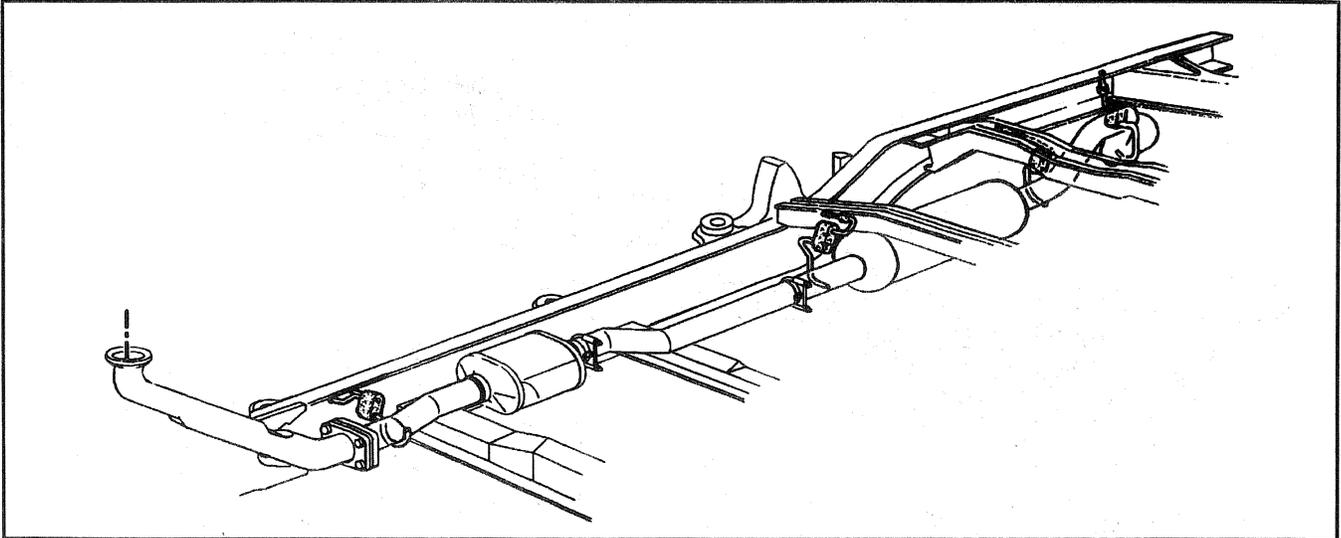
Exhaust System - C/K 1, 2 and 3 Extended Cab Long Box w/6.5L Diesel Engine
